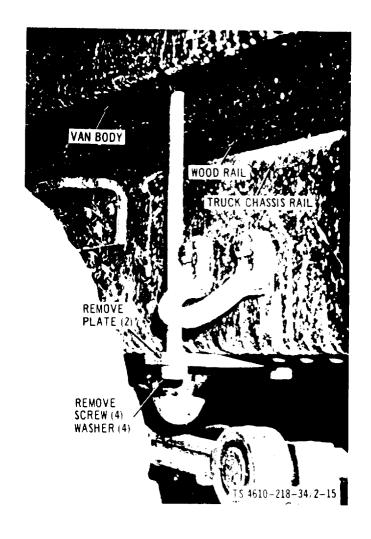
Van Body Mounting, Rear, Removal and Installation
